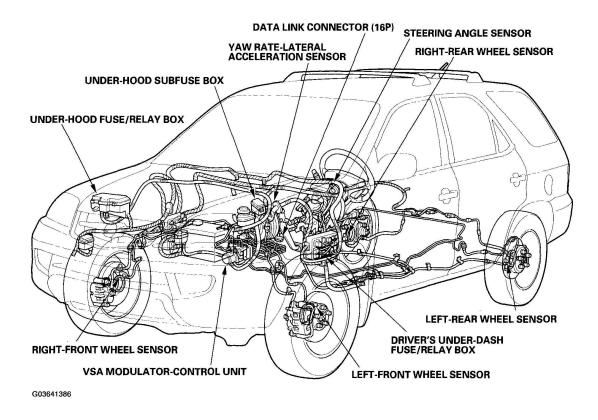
Component Location Index Courtesy of AMERICAN HONDA MOTOR CO., INC.
